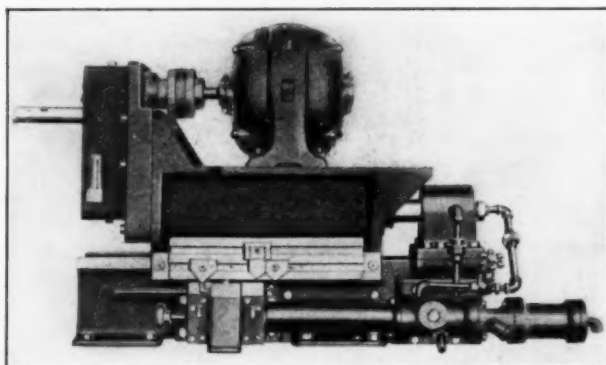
4-IN. TRAVELING-HEAD UNIT
